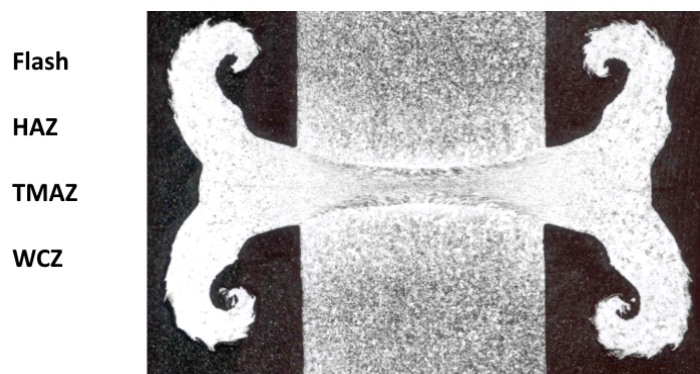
A Macroscopic image of weld joint by rotary friction (Sato et al., 2015)
